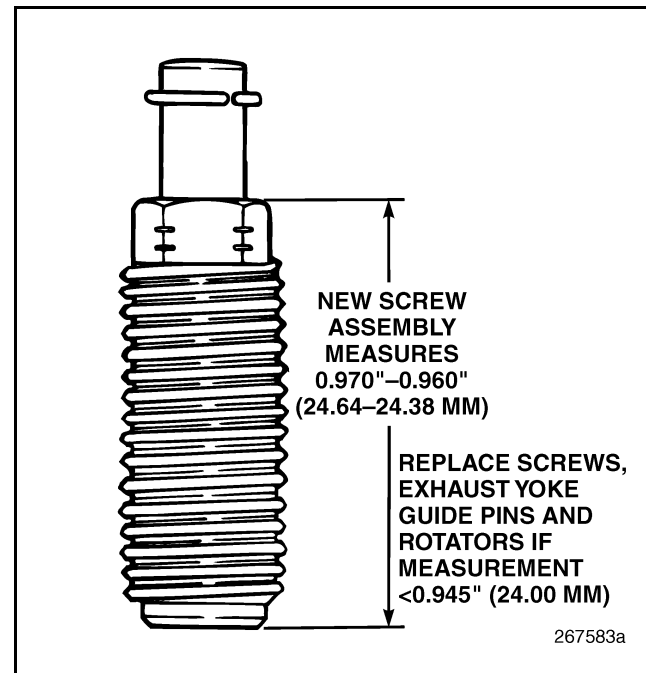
J-Tech™ Exhaust Valve Adjusting Screw Dimensions
